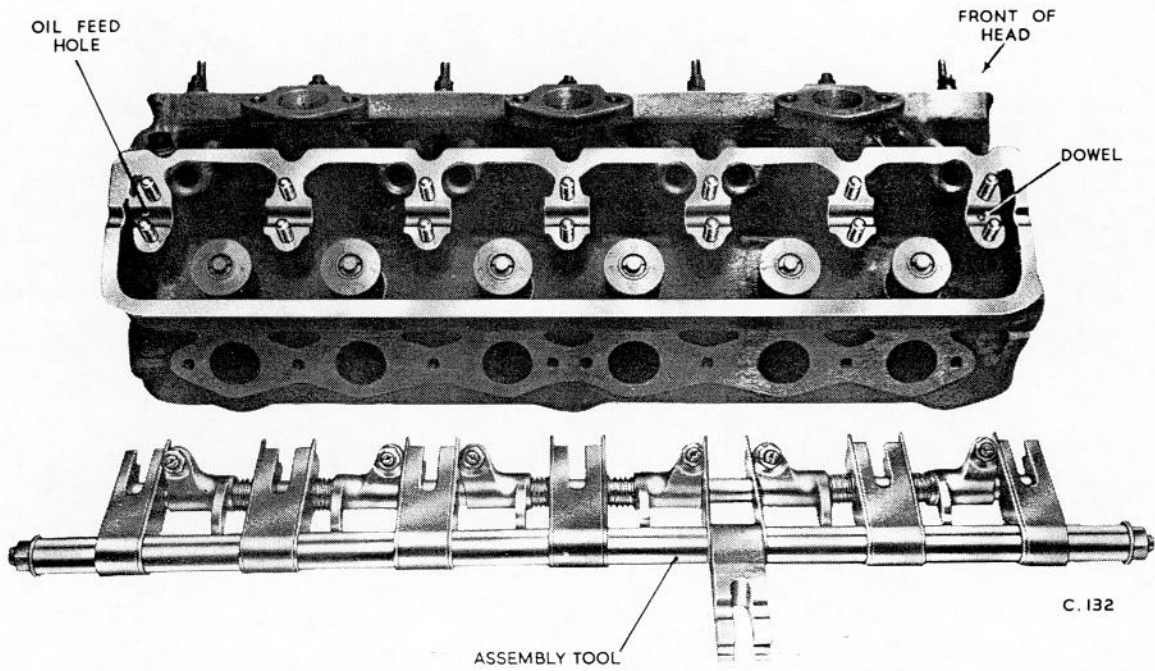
Exhaust rocker spindle assembly in assembling tool.
